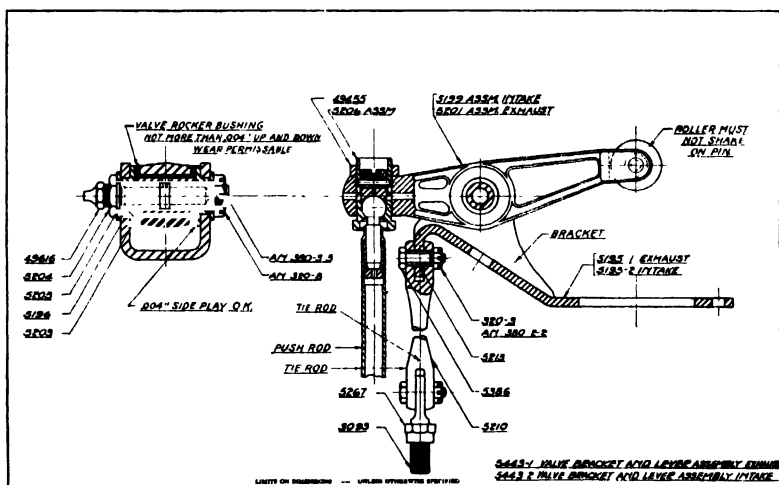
Valve Bracket and Lever Assembly of Fairchild-Camenz Engine.
